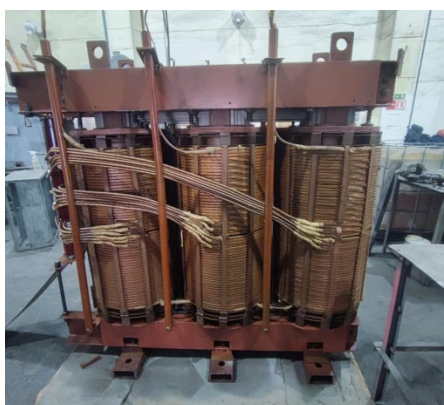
Damaged windings of a transformer of type TMH-1600/35-80Y1
